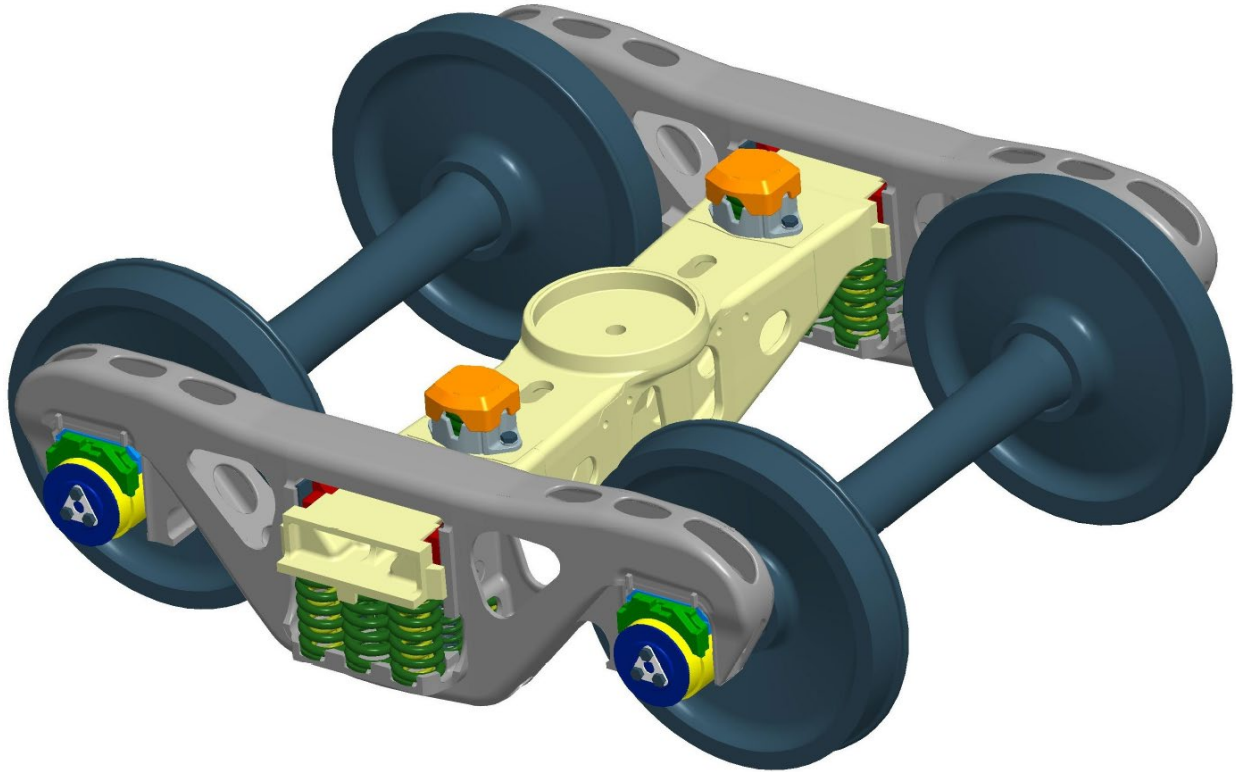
Typical three-piece truck (courtesy Amsted Rail)
